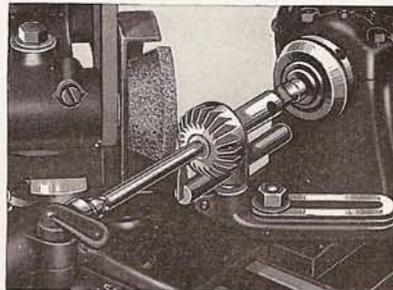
Sharpening a Valve Seat Reamer Using Holding Fixture with Spring Stop. Holding Fixture, as shown, Cat. No. 19-W. \$6.00
